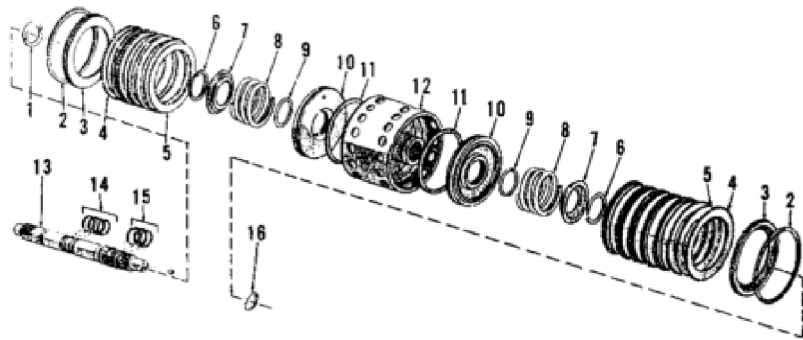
Exploded view of Clutch 2 and 3 assembly and transmission mainshaft.
